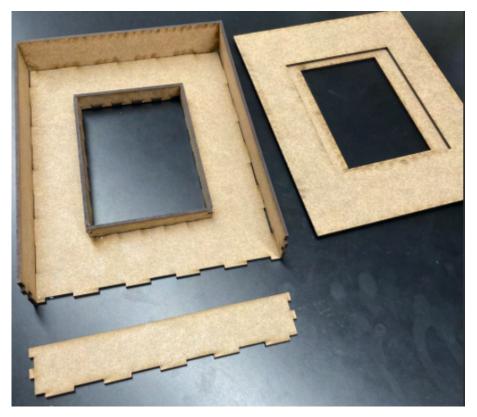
Photo of the laser cut HDF showing the parts being not completely assembled
